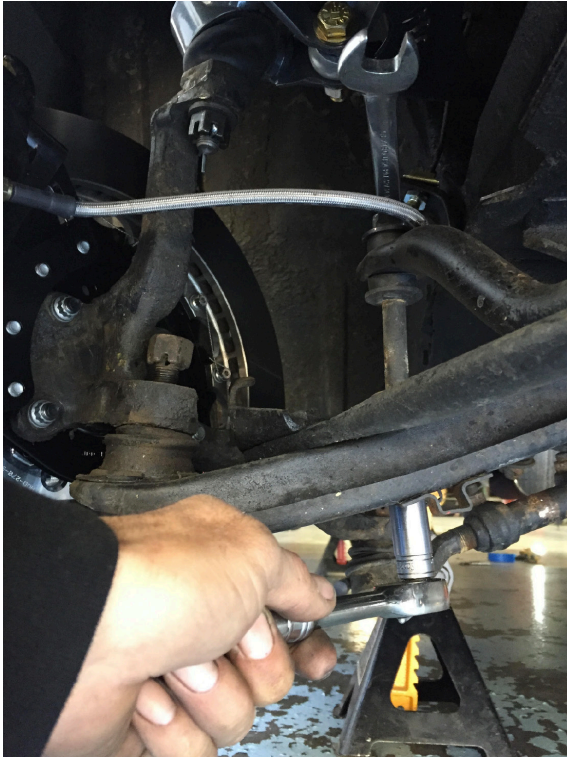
Here the hardware is being removed that connects the sway bar and strut rod to the stock lower control arm.
